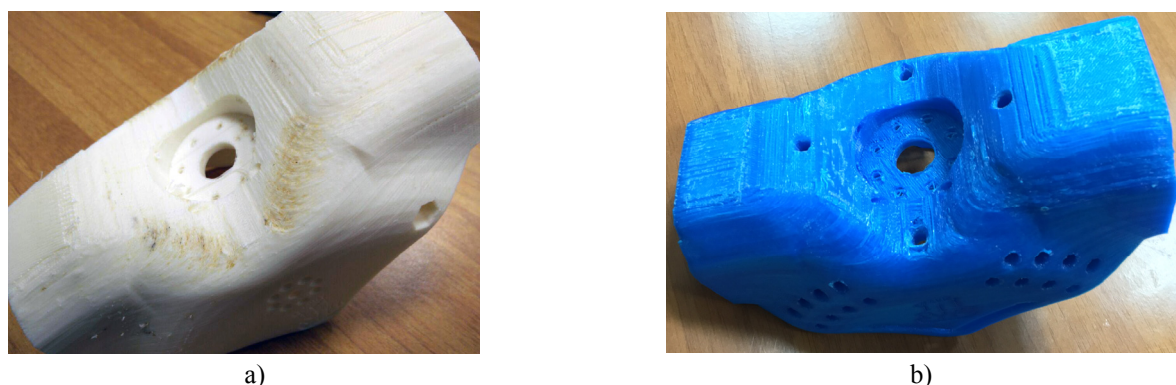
CAUTO preliminary Chest Test: a) Printed chest using ABS with overheating issue, b) Printed chest using PLA.
